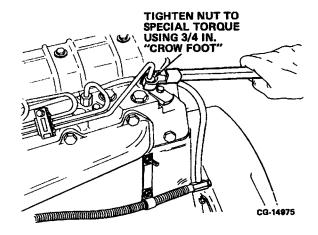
Install Injection Line Connector Nuts to each Nozzle
